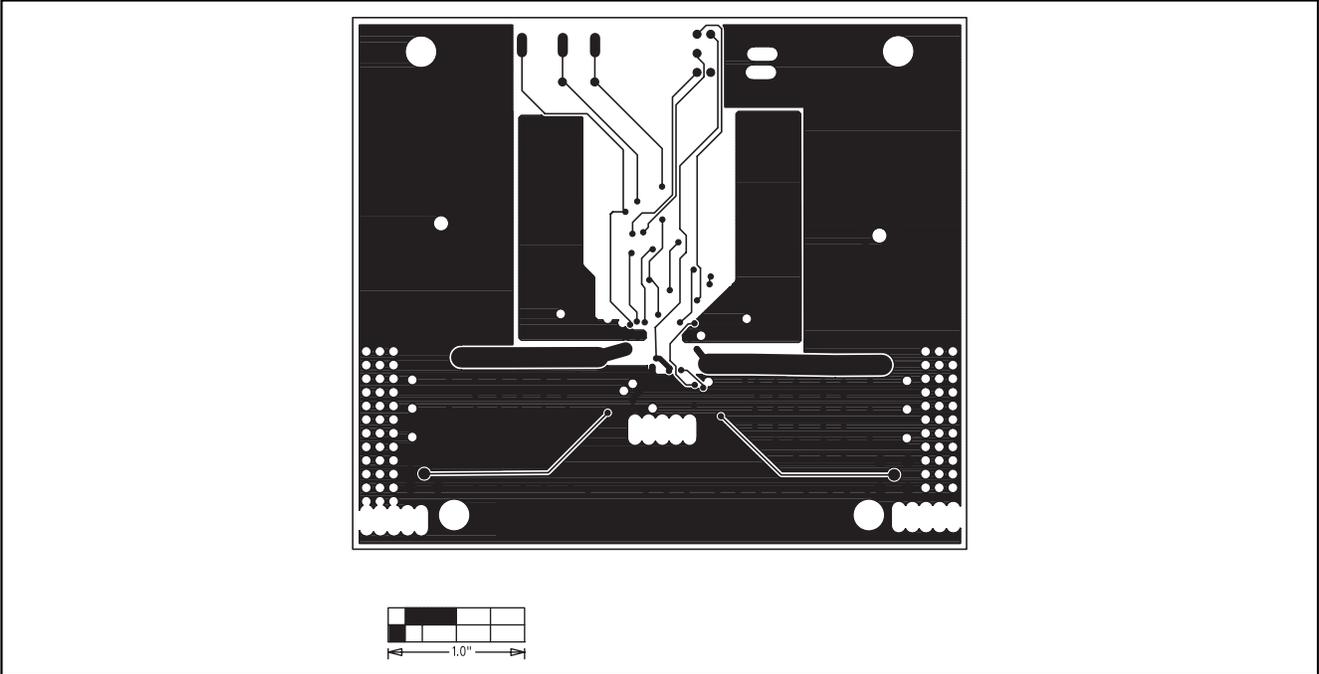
MAX1955 EV Kit PC Board Layout—Layer 3
